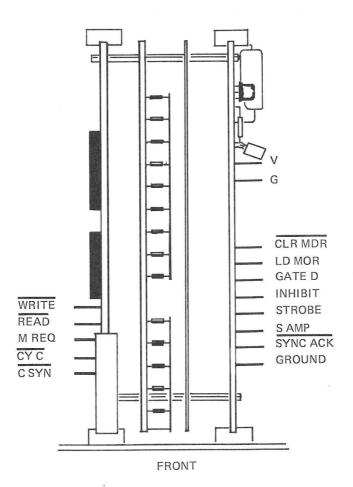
Test points on P7001 Core Memory assembly (Controller and Address Driver board and Memory Data Register board).
